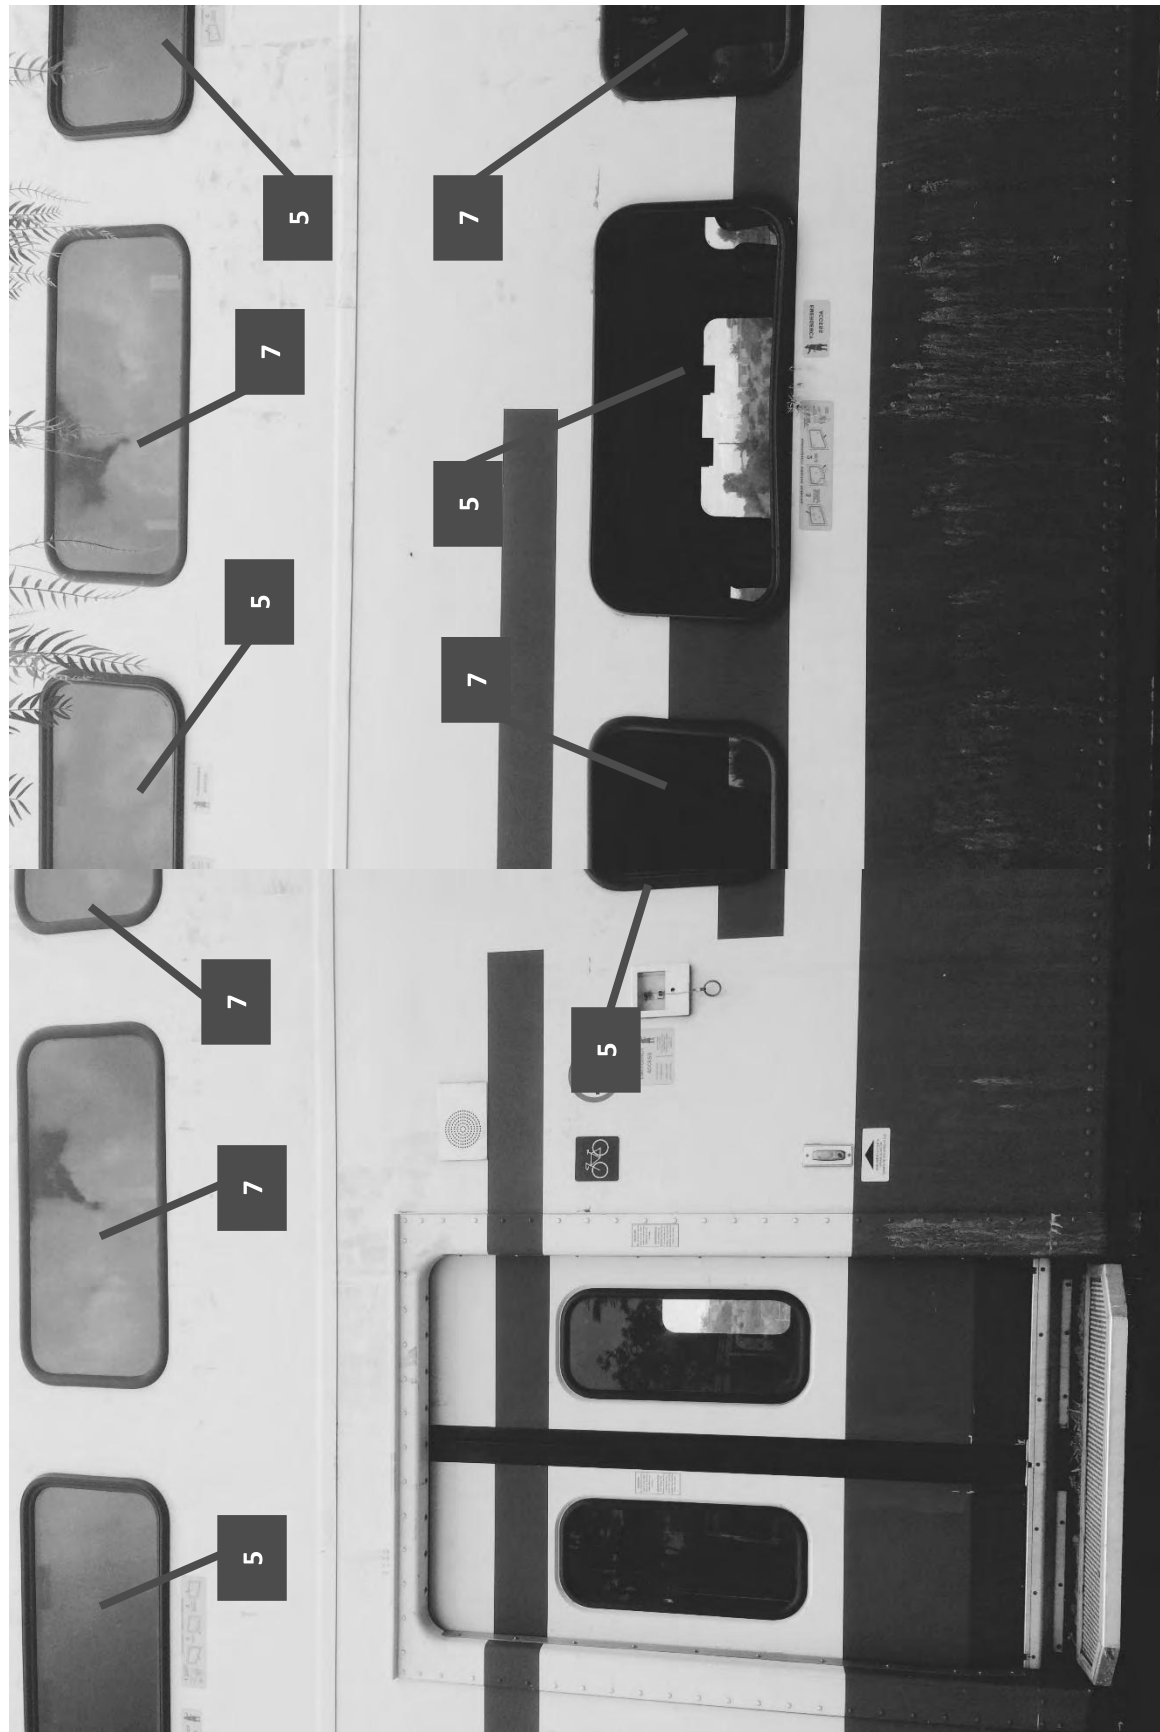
2 - #206 BOMB TRAILER CAR LH Side
